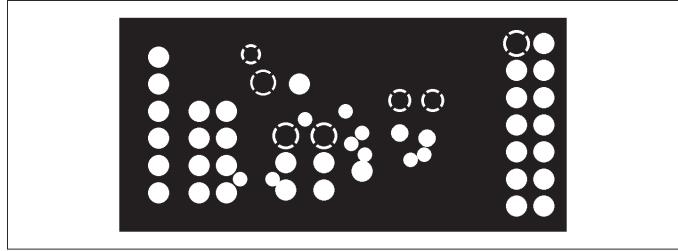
MAX5825PMB11 Peripheral Module PCB Layout—Inner Layer 2 (Power)
